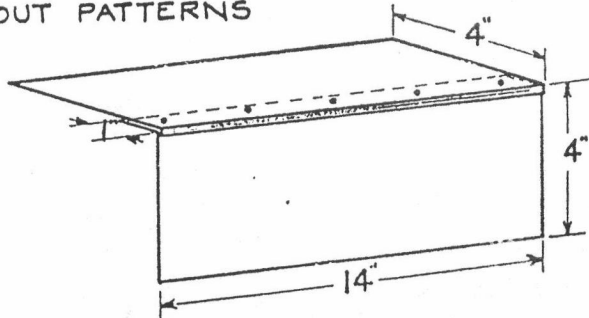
PERSPECTIVE VIEW OF CORNER SEAM.
